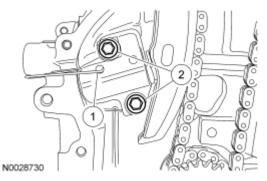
Locating Timing Chain Tensioner Bolt Courtesy of FORD MOTOR CO.
